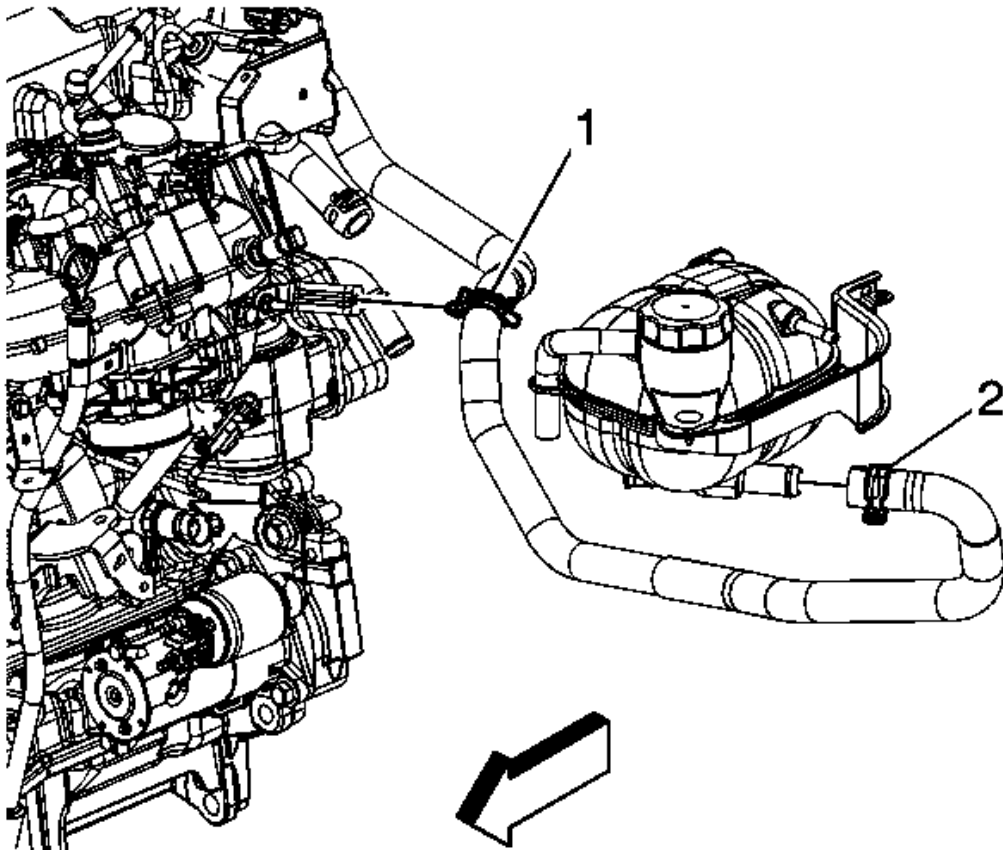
Identifying Surge Tank Outlet Hose Clamp (At Surge Tank)
